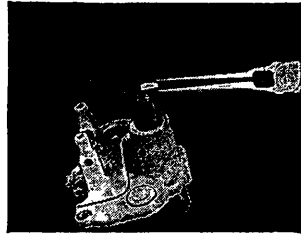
Install bowl cover strainer gauze, strainer nut and gasket
